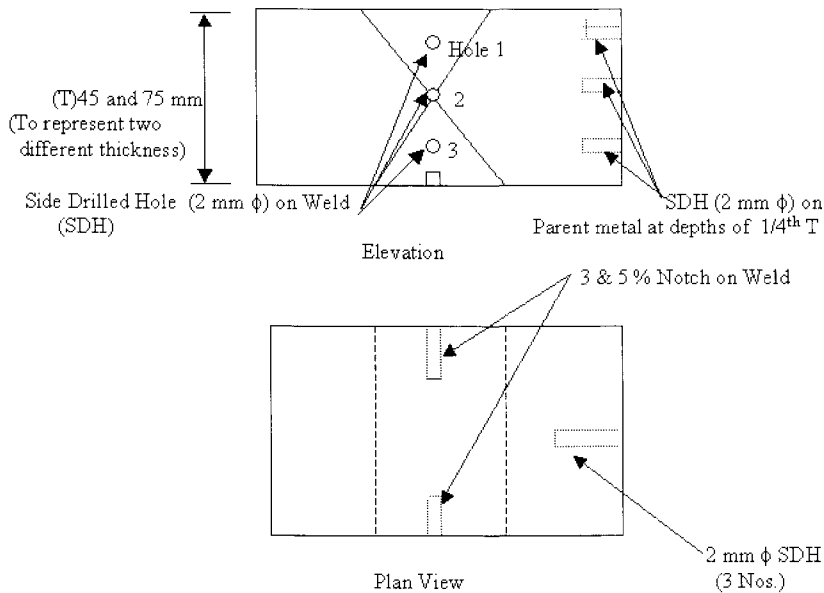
Mock-up weld pad with reference reflectors
